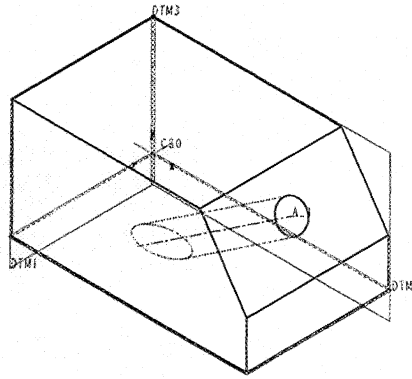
(k) Adding a Hole to the Angled Surface
